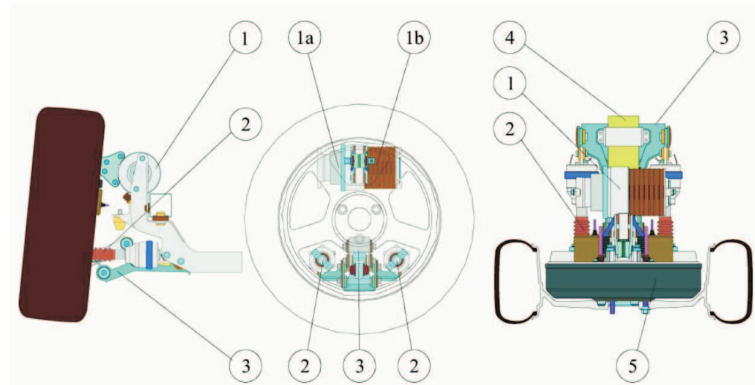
ACM design proposal showing front, side and top views. 1) Damper a) with adjustable spring b), 2) Steer actuators, 3) Lower arm, 4) Leaf spring, 5) In wheel motor [8].
